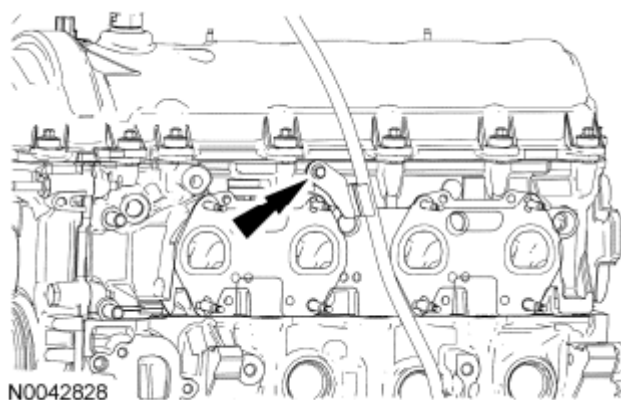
Locating Oil Level Indicator Tube And Bolts
